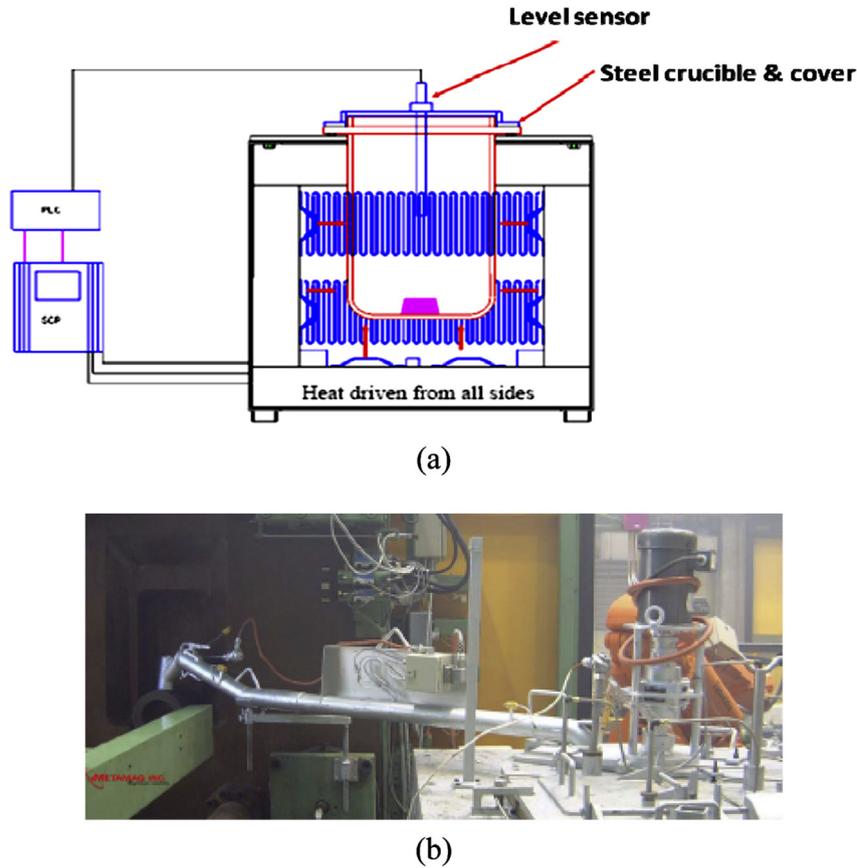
(a) Modern electrical furnace with a steel cover; and (b) metal transfer tube delivering molten magnesium to a die casting machine (Courtesy of Metamag, Inc., Strathroy, ON, Canada).
